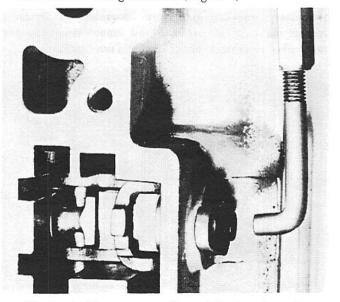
Transmission Control Shaft and Pawls Revised April 1960 Page 43
